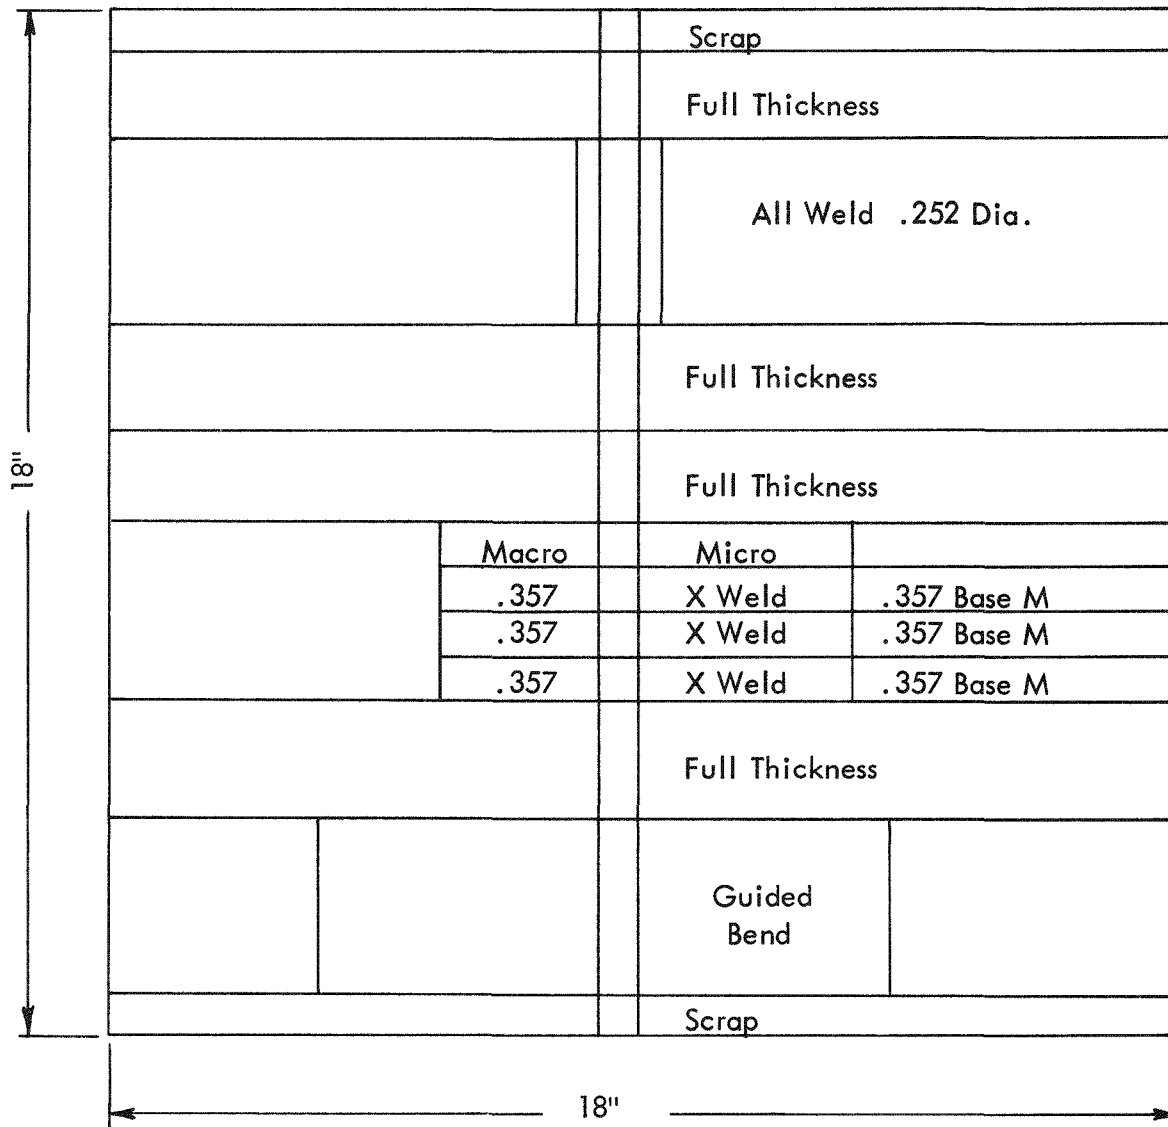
SPECIMEN LAYOUT FOR ALL WELDMENTS OF 6061 ALUMINUM, CONDITION 1-4, PROCEDURES A, B, and C
